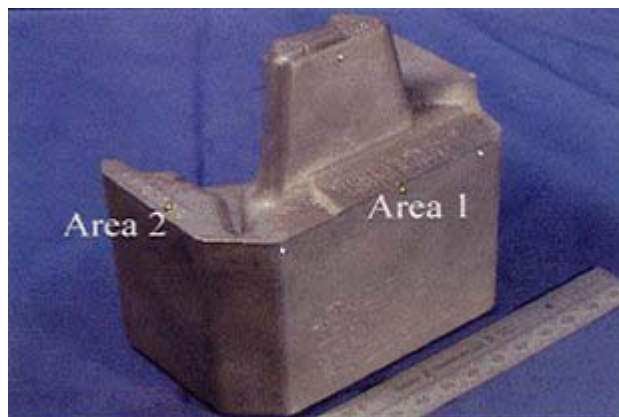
Photograph of a used GM insert, detail 504, showing heat-checking in area 1.
